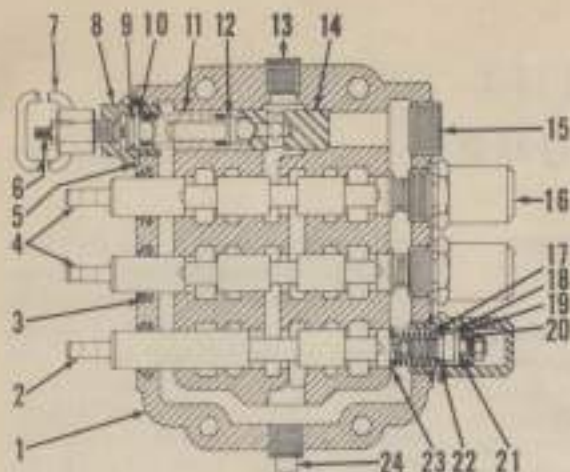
Cut-away view of later production 3-spool remote control valve (optional equipment). A similar 2-spool valve is also available.
